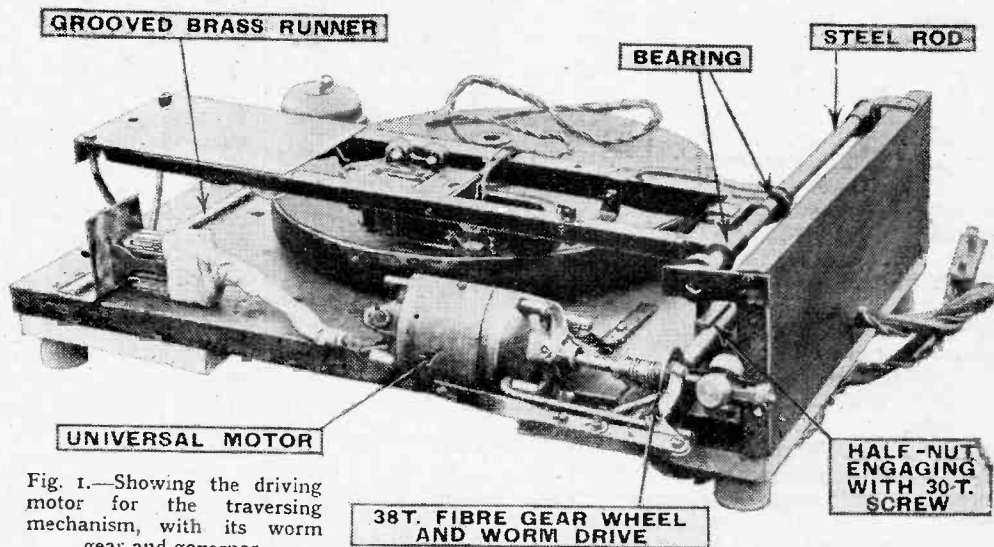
Showing the driving motor for the traversing mechanism, with its worm gear and governor.
